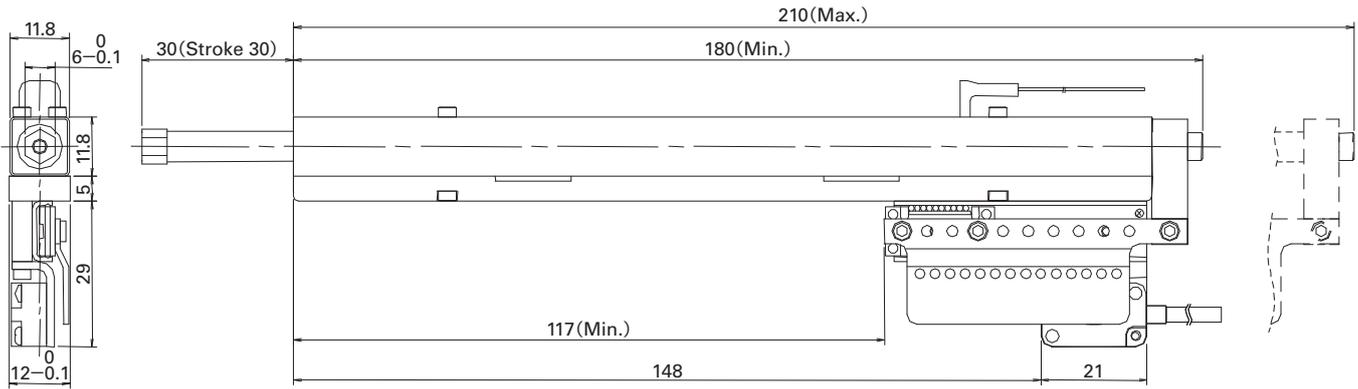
Structure and dimension of the Compact Cylinder Linear Servo Motor
